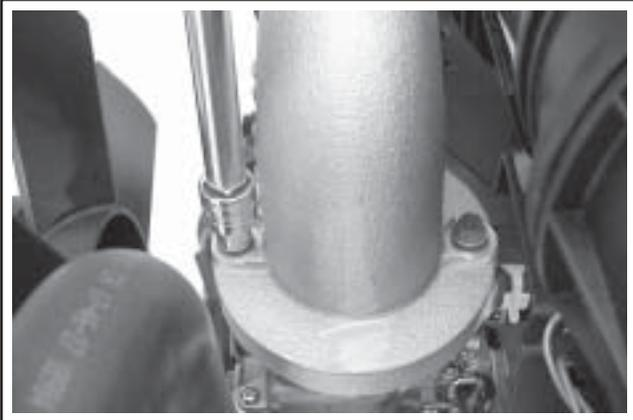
Removing Elbow Adapter Mounting Screws.
